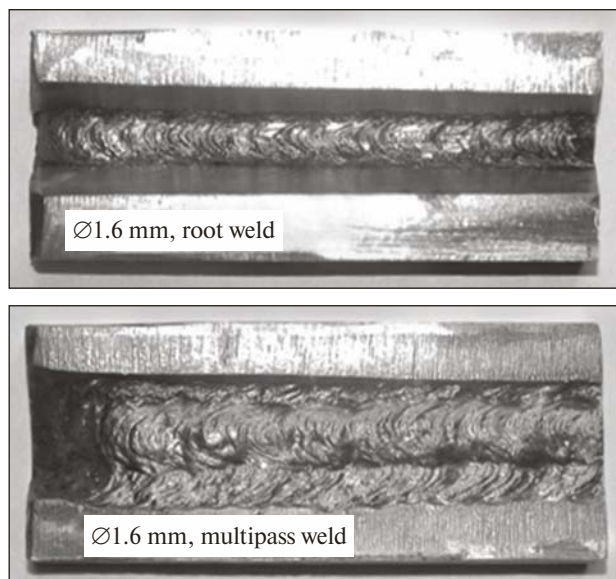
Welds made by wet underground welding of high-alloy corrosion-resistant steel of 18-10 type
